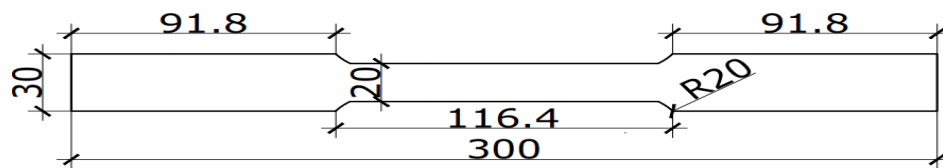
Specimen dimension for tensile stress measurement on UTM-2000kN machine
